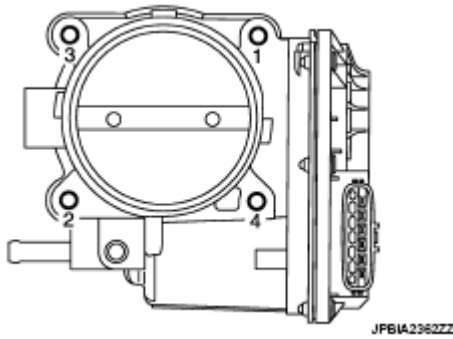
Identifying Electric Throttle Control Actuator Mounting Bolts
